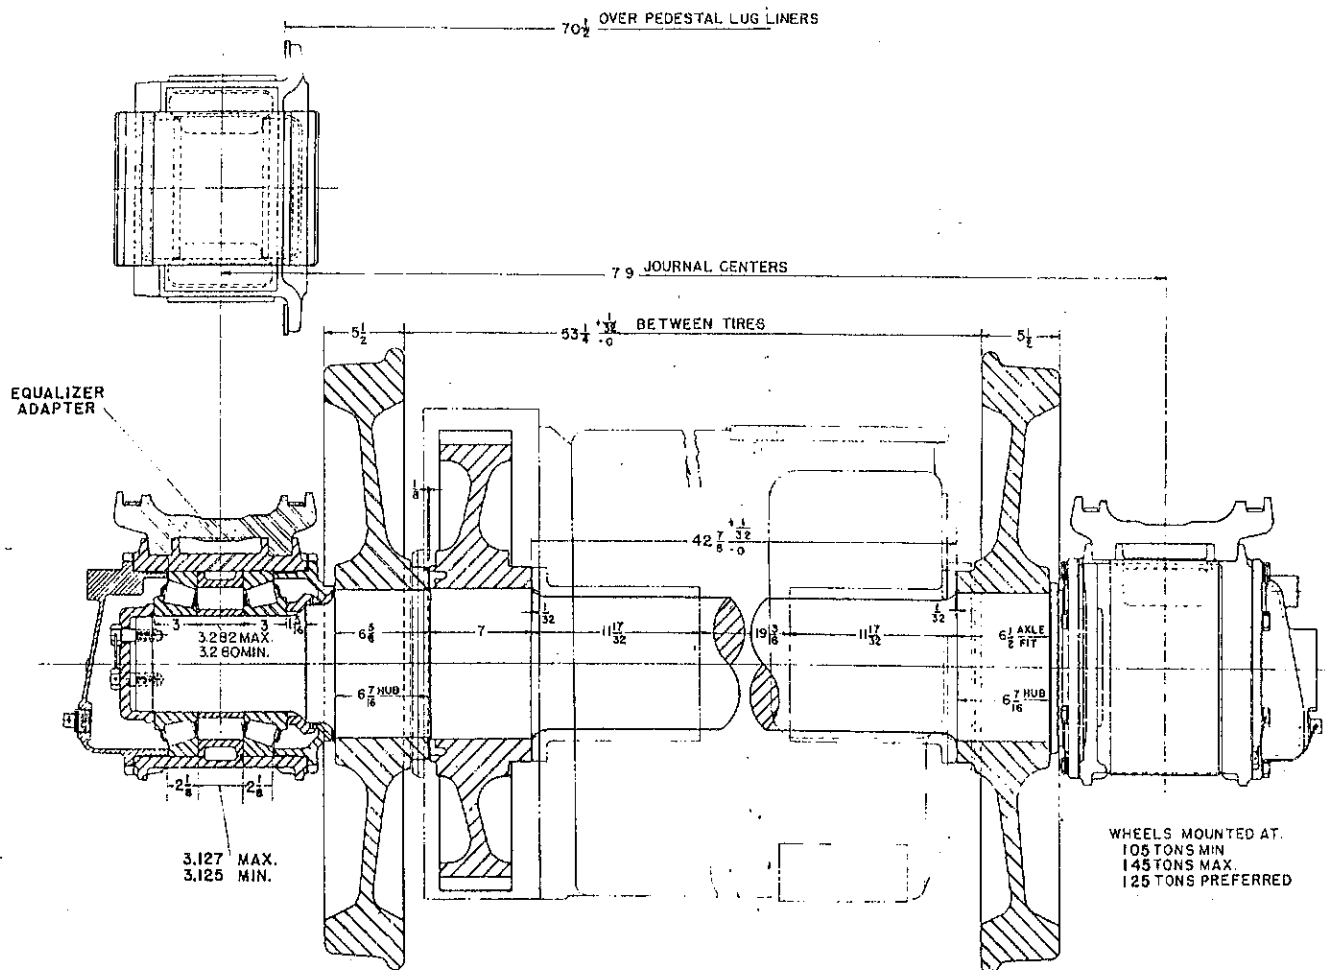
WHEEL, AXLE AND BOX ASSEMBLY
